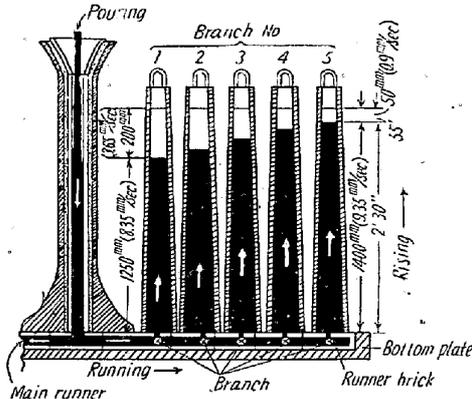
Arrangement of moulds and casting conditions of 100 kg type ingots.
